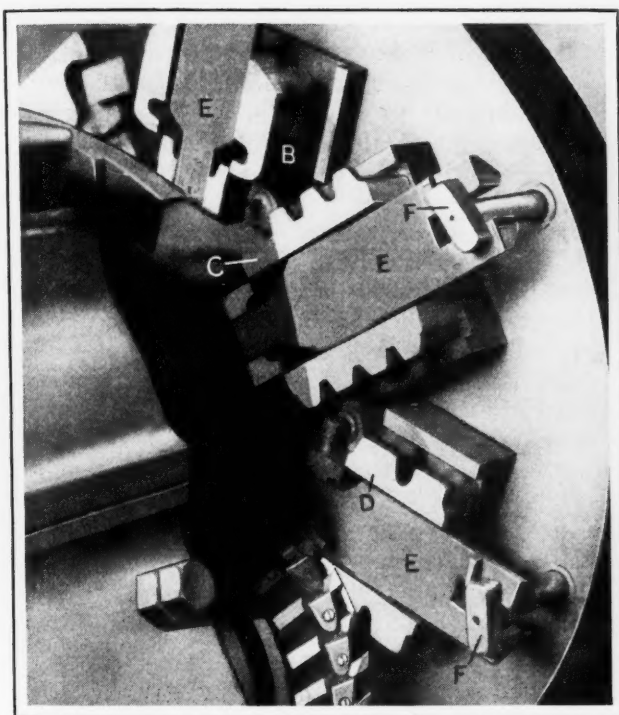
Rough and Finish Face-milling Operation Performed on all Three Cap Castings
